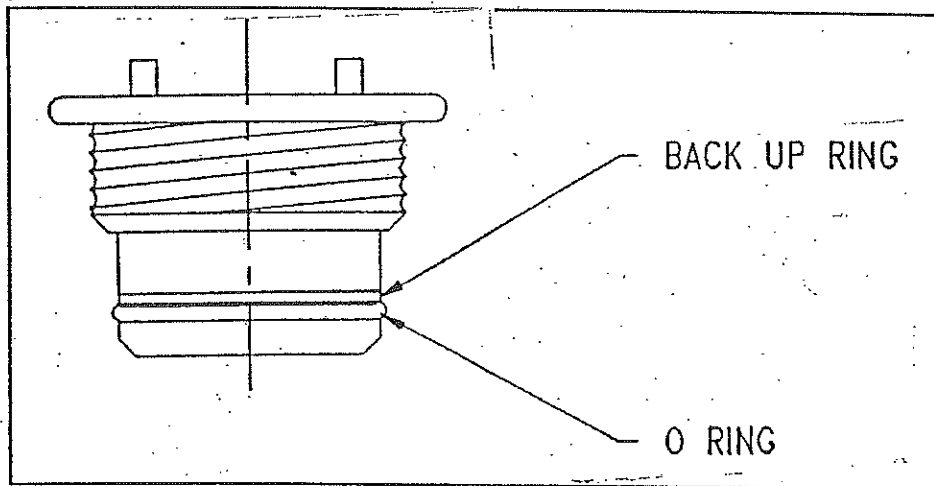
TOP PLUG "O"-RING AND THREAD LUBRICATION
